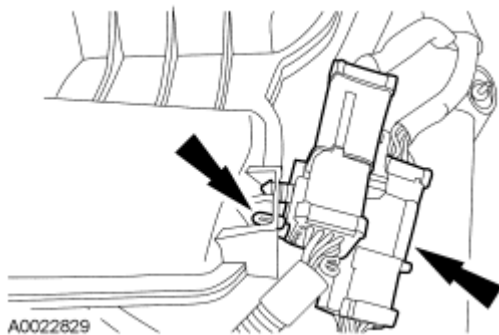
Locating Engine Control Sensor Wiring Connectors
